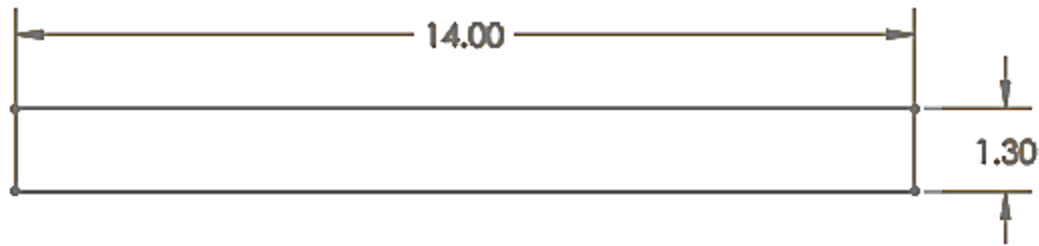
Dimensions for longitudinal and transverse flexural test specimens [8]
